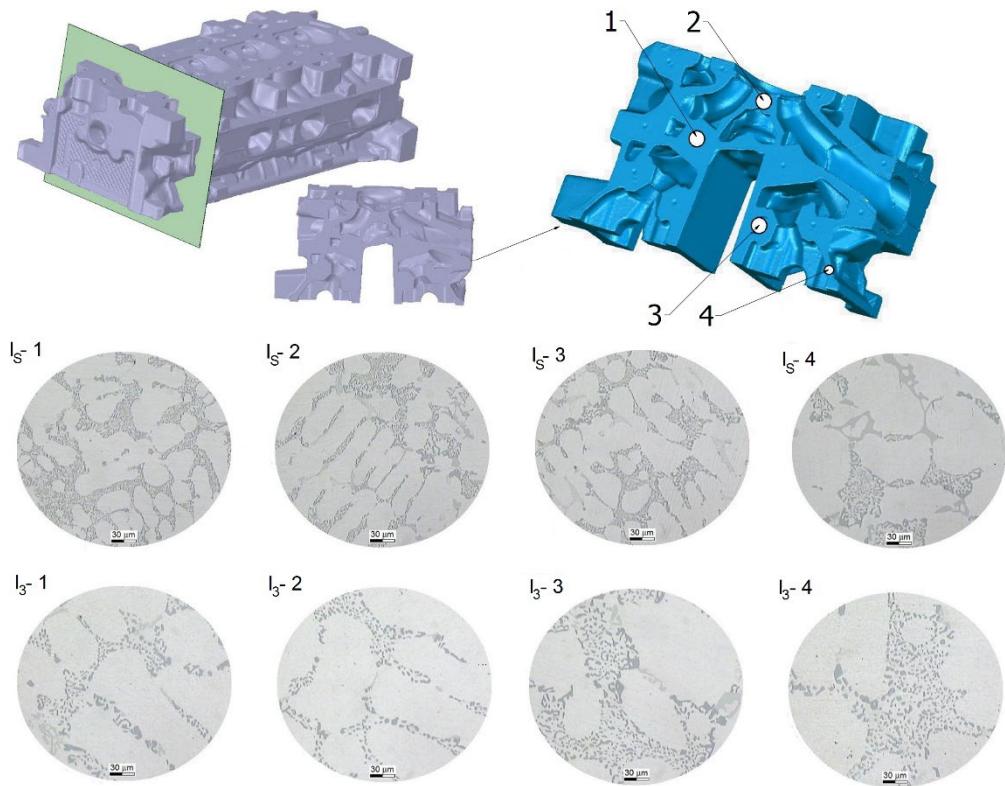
Microstructure in a selected places of cross-section of the cylinder head: Is – casting without the heat treatment, I₃ – casting after the heat treatment (500°C/1 h + 175°C/2 h)
